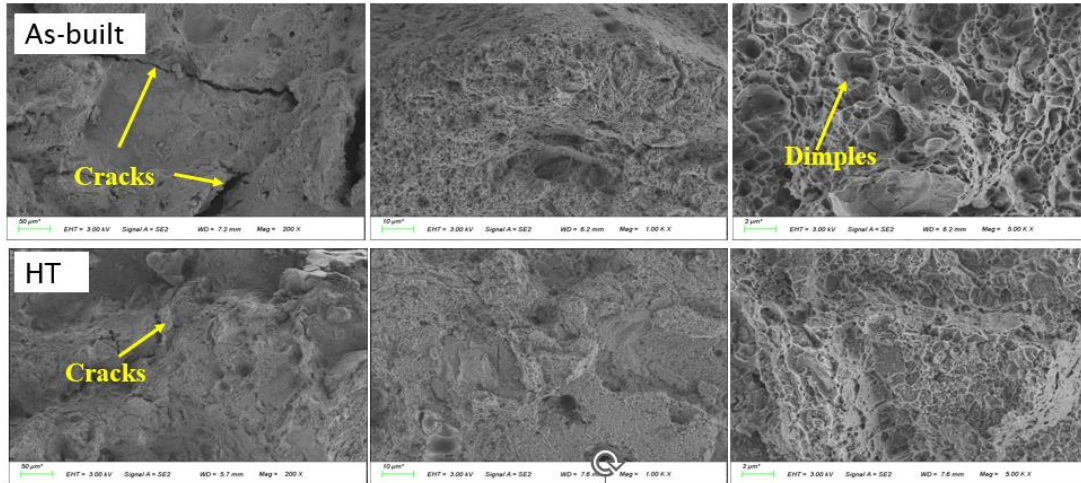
Fracture morphologies of the as-built samples after fracture testing: (a) AA7075+1% Ti and (b) HT AA7075+1% Ti.
